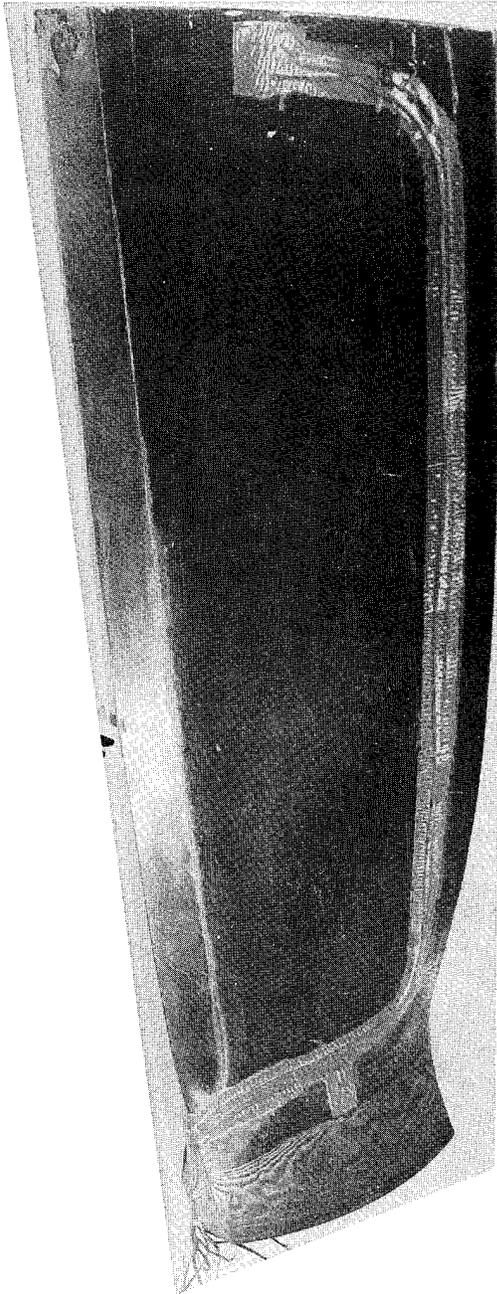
Dye Penetrant Inspection of Dovetail
